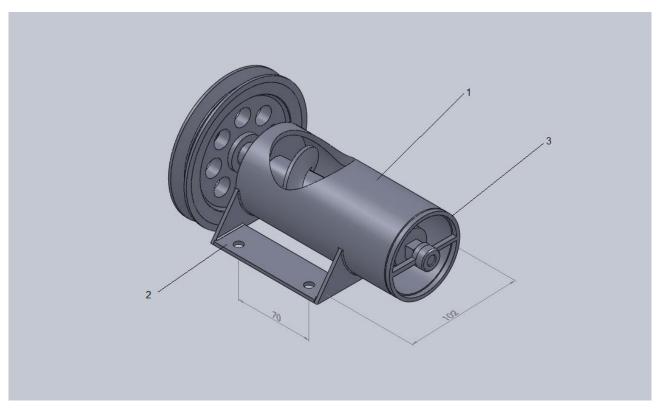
Drive of extruder press for briquettes from tobacco residues: 1 - screw conveyor with variable pitch; 2 - front leg; 3 - rear leg; 4 - drive pulley
